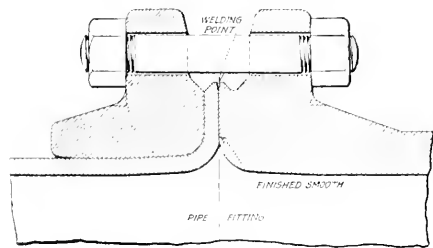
SPECIAL WELDED JOINT FOR EXTRA HEAVY STEAM PIPING
